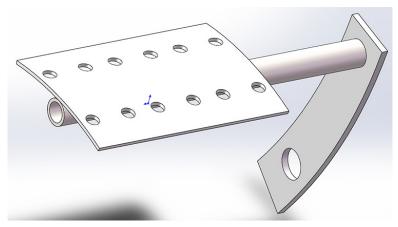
Existing encoder cable support bracket (DT21050), which will be replaced.
